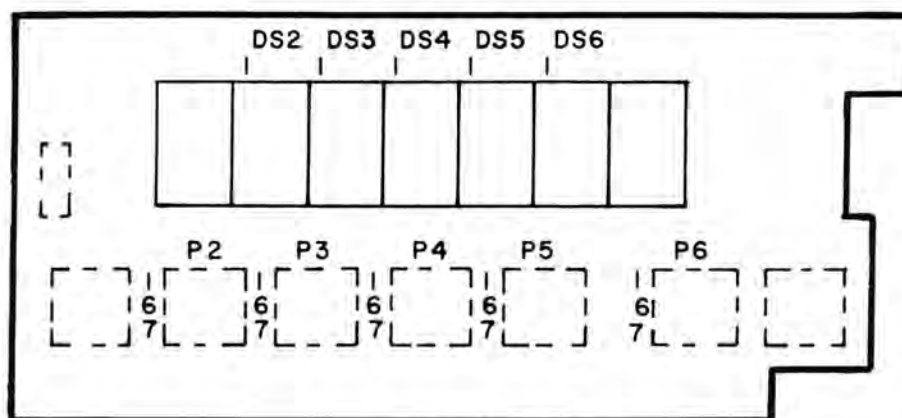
Type 796104 Display P.C. Assembly (A8),
